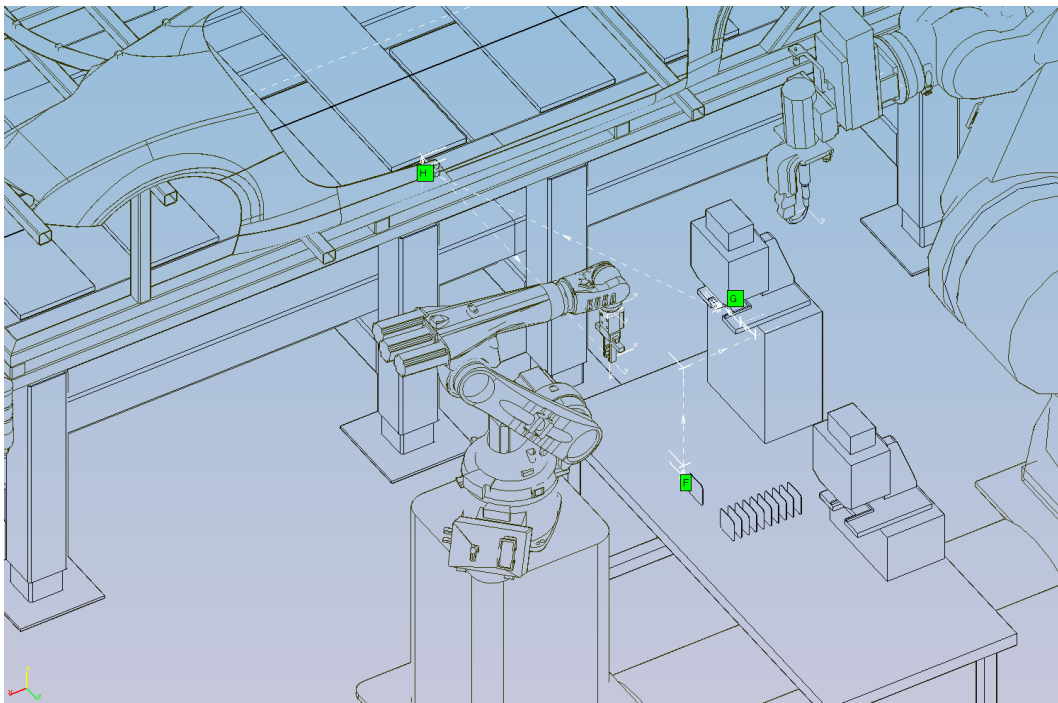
Sections of a Welding Line - Plate flow
